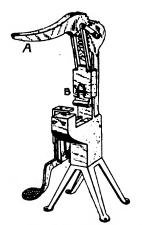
MR. MILEK'S WELDING MACHINE
